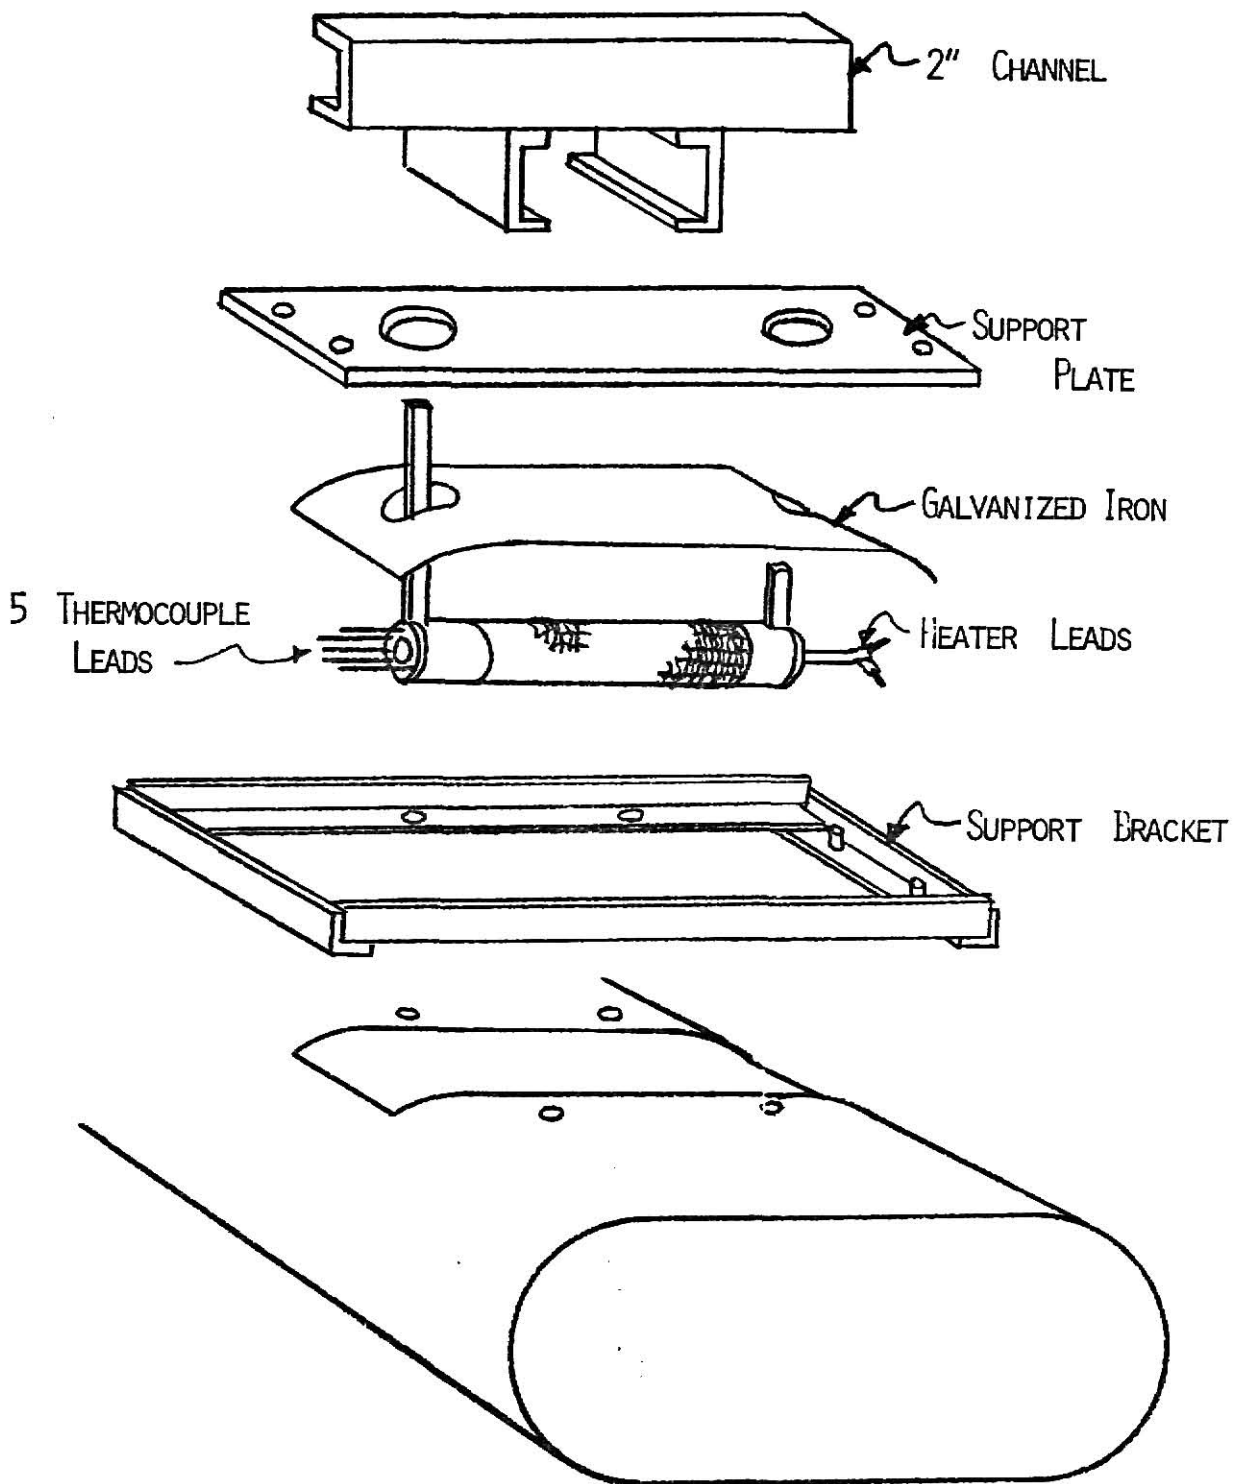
ISOMETRIC OF THE TEST SUPPORT SYSTEM
